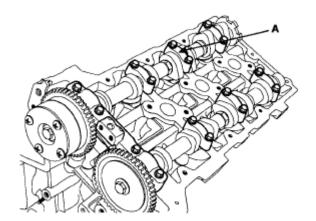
Measuring Valve Clearance (No. 4 Cylinder) Courtesy of HYUNDAI MOTOR CO.
